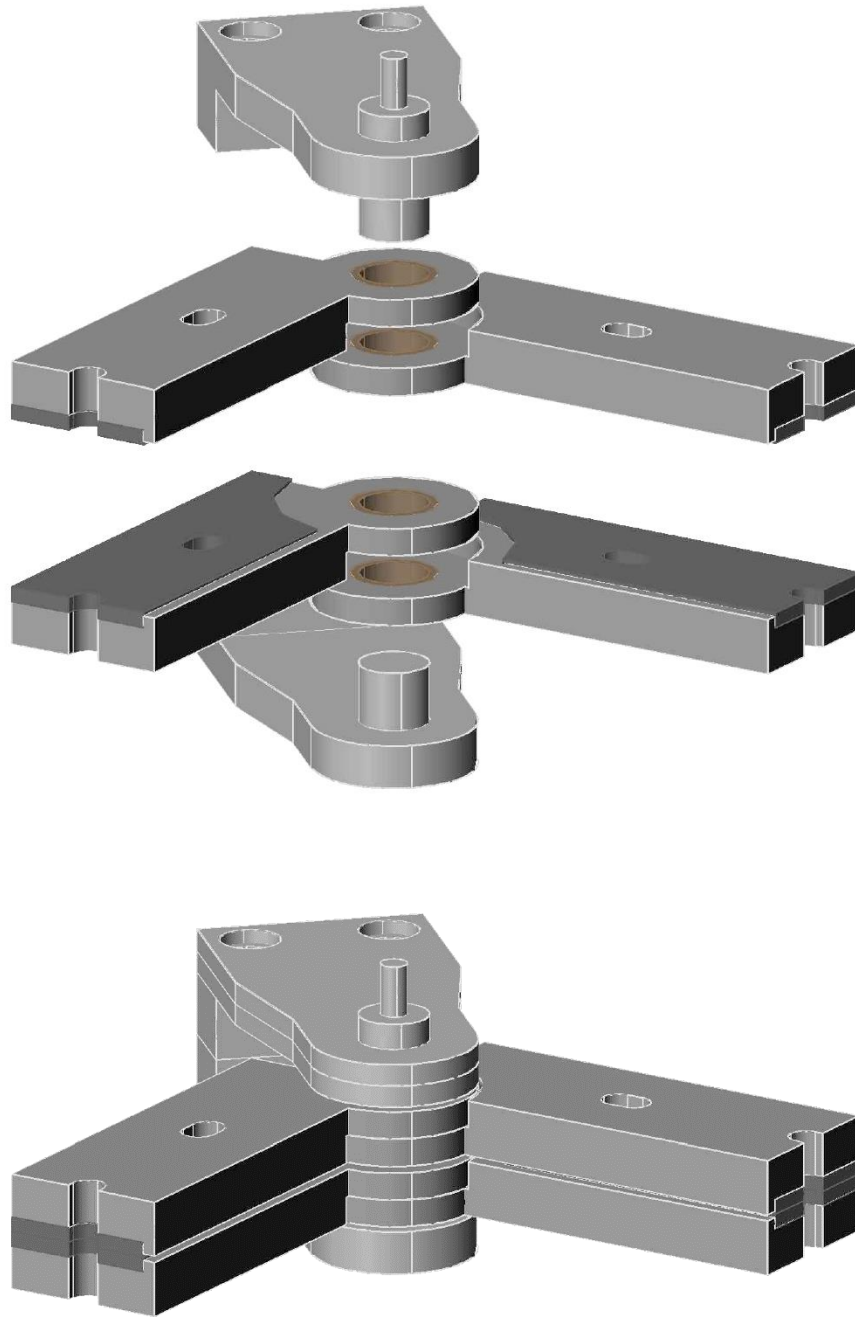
Three-dimensional views of the frame's corner detail: (top) an exploded view illustrating, from top to bottom, upper part of corner bracket, adjacent upper bars, corresponding adjacent lower bars and lower part of corner bracket; and (bottom) assembled view, note the gap running through a central horizontal plane of the hinge
